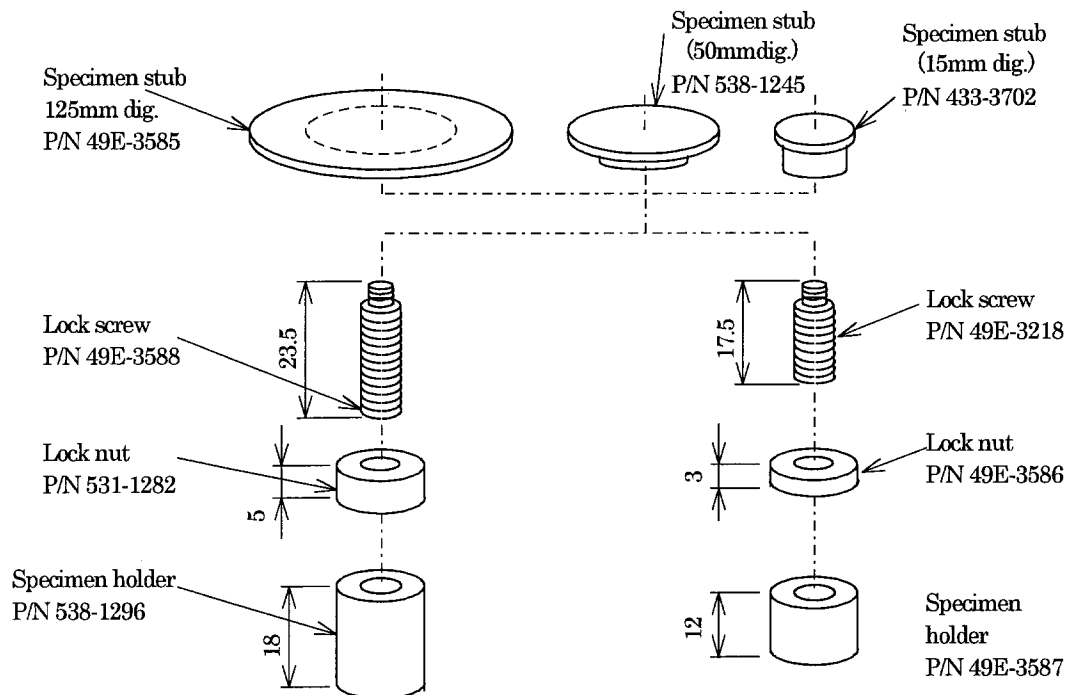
How to Fix Specimen Stub (large-size eucentric stage)
